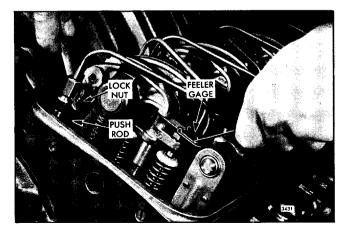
Adjusting Valve Clearance (Unloaded Valve Bridge)
